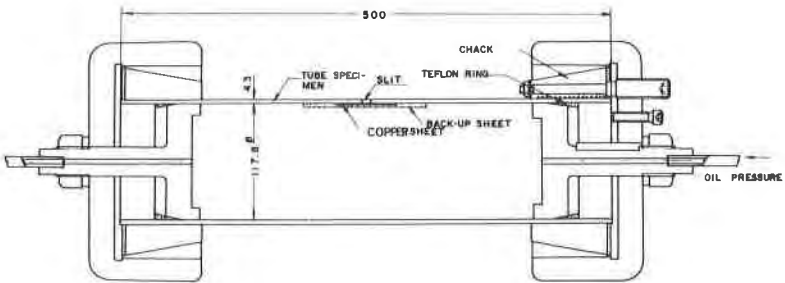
Construction of Specimen Assembly for Tube Pressurizing Test
